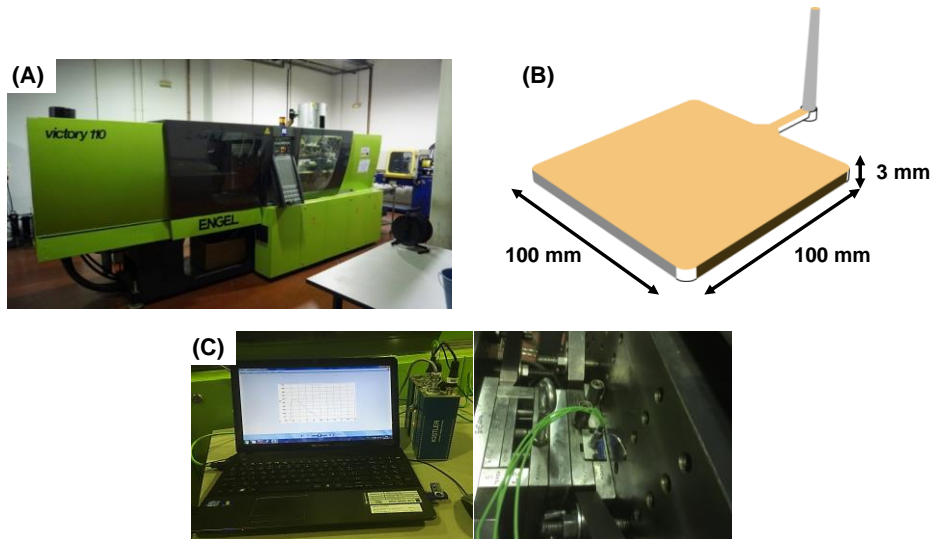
Injection moulding machine Engel Victory (a); dimensions of injected moulding samples (b); sensor for measuring and recording the mould cavity pressure (c).
